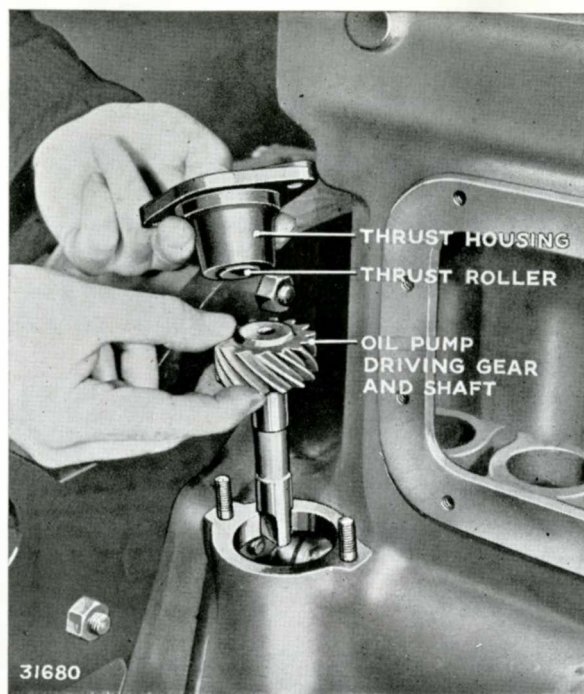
FITTING OIL PUMP DRIVE GEAR AND THRUST HOUSING
